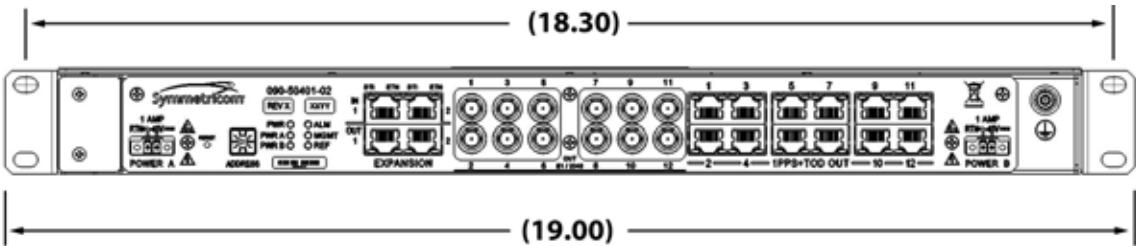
TP E10 and TP E30 Chassis Dimensions - Top View
